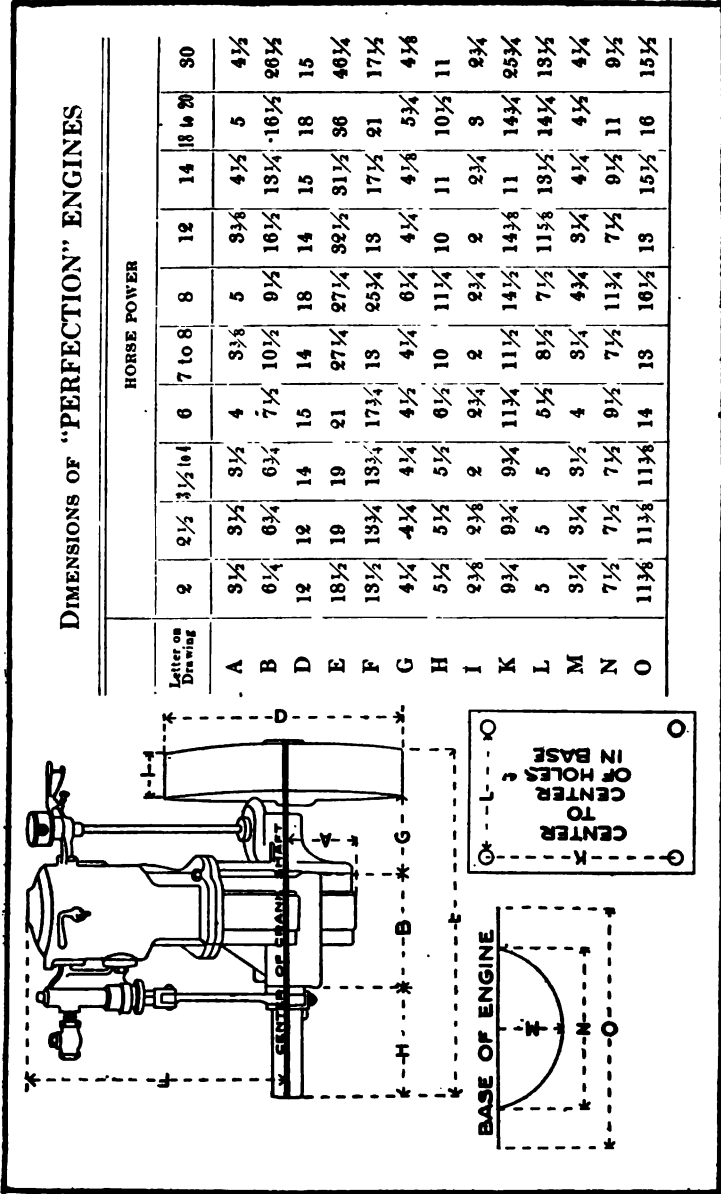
Diagram giving principal dimensions of Perfection marine engines.
